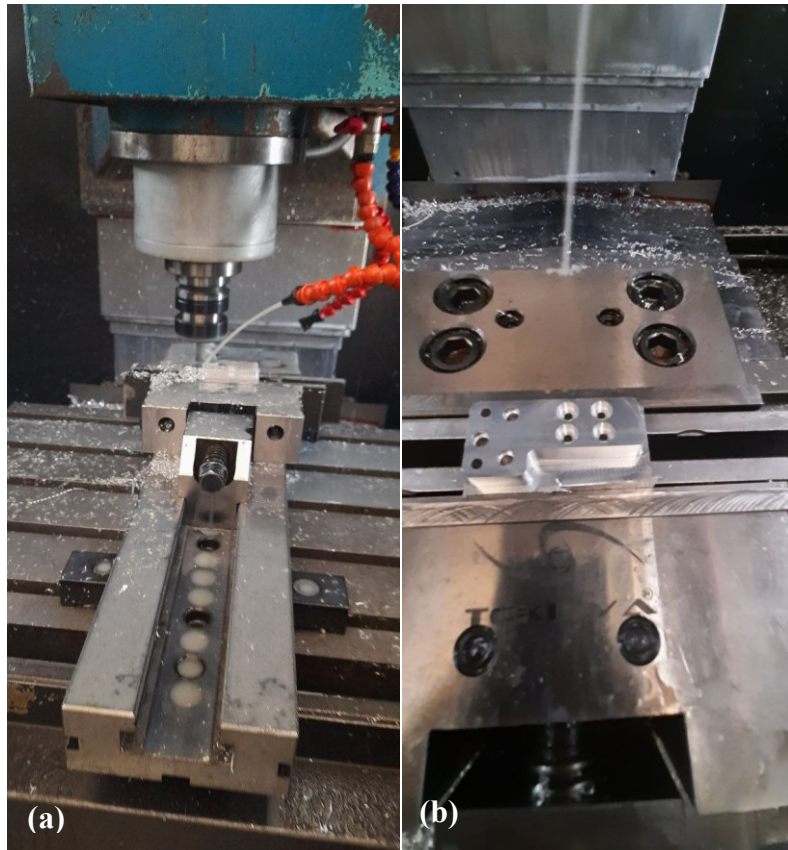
Manufacturing process of the connectors (a) Milling process (b) Finishing machining of one face of the left connector
